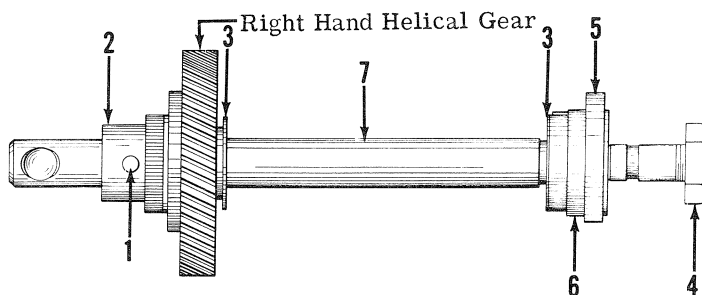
SHAFT ASSEMBLY - LATERAL CAM
